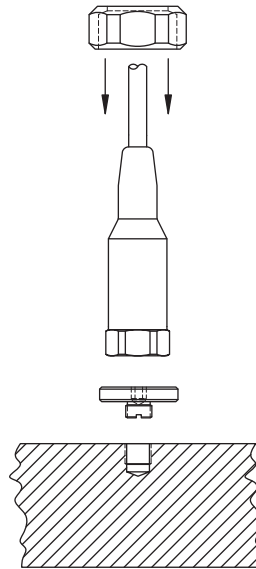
Using a torque wrench, hex nut is tightened to the recommended torque while holding cable or connector in desired location.
